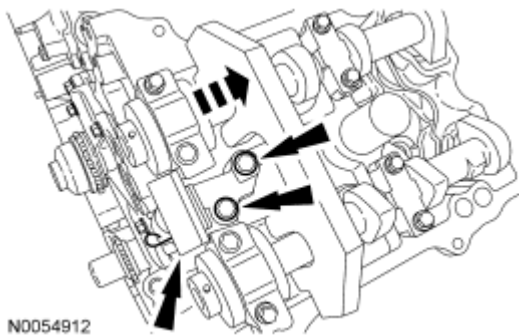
Locating LH Secondary Timing Chain Tensioner Bolts
